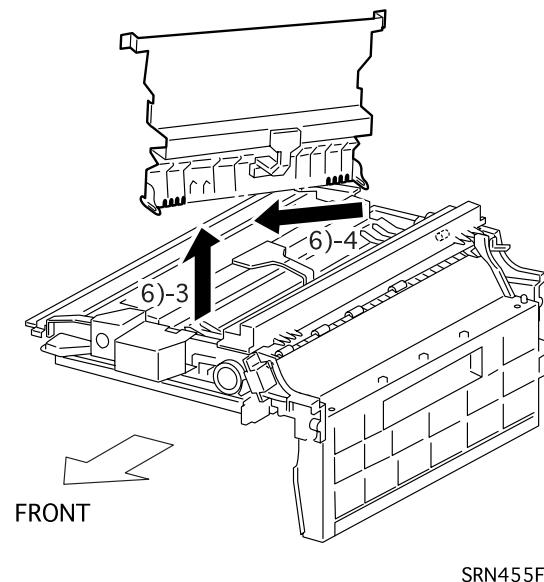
REGI. CHUTE ASSEMBLY Removal (2/2)
